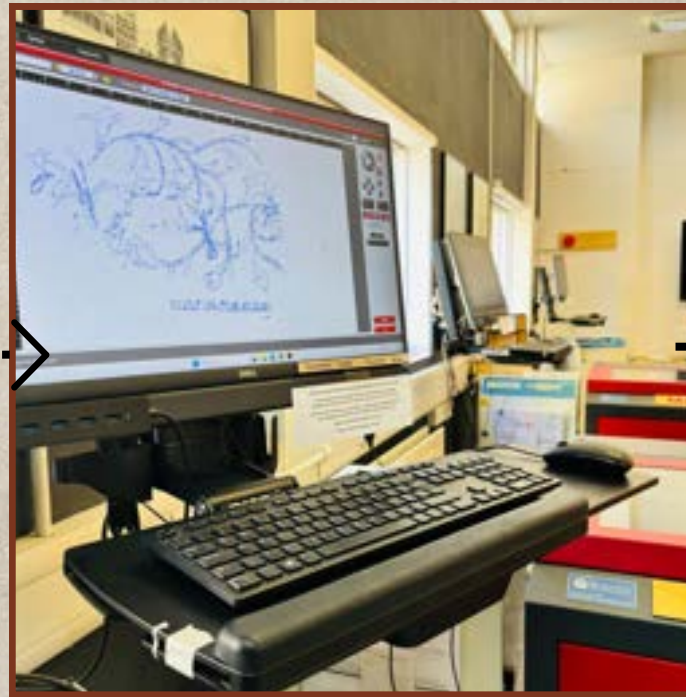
Generated the line drawing through illustrator and sent it to lazer cutting workshop
